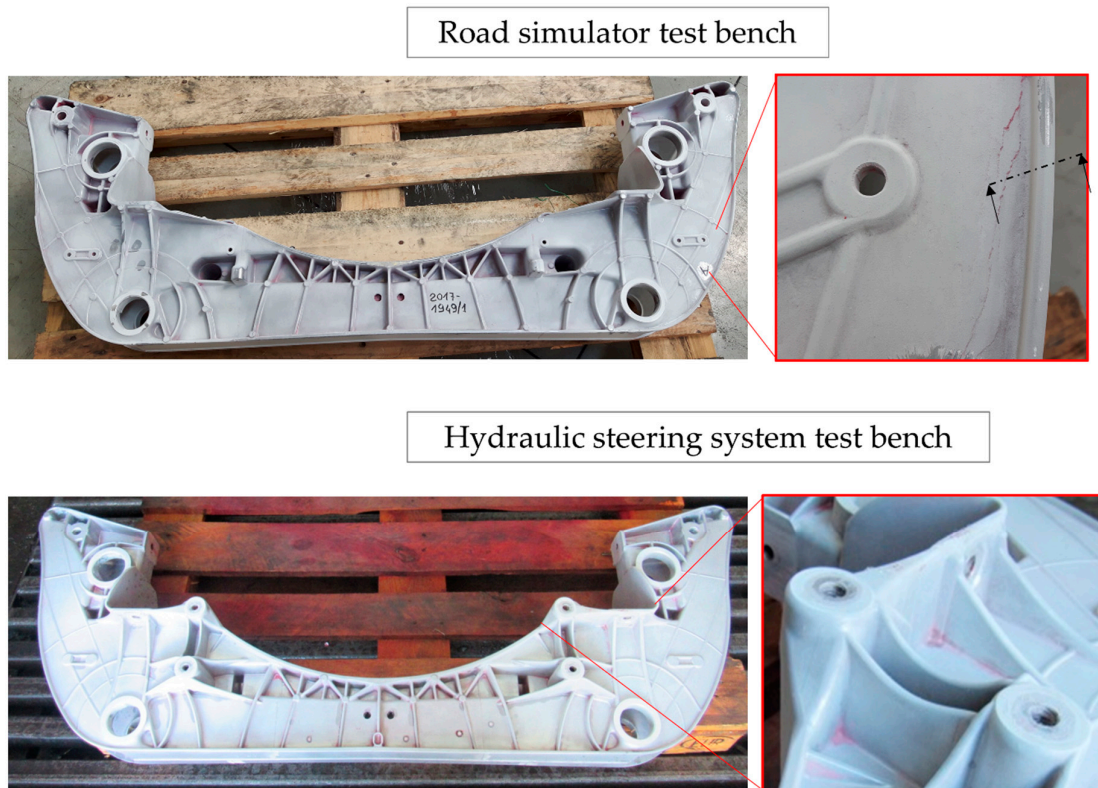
Liquid penetrant testing on cross beam after the road simulator and hydraulic steering system test benches. Arrows indicate the metallographic sections.
